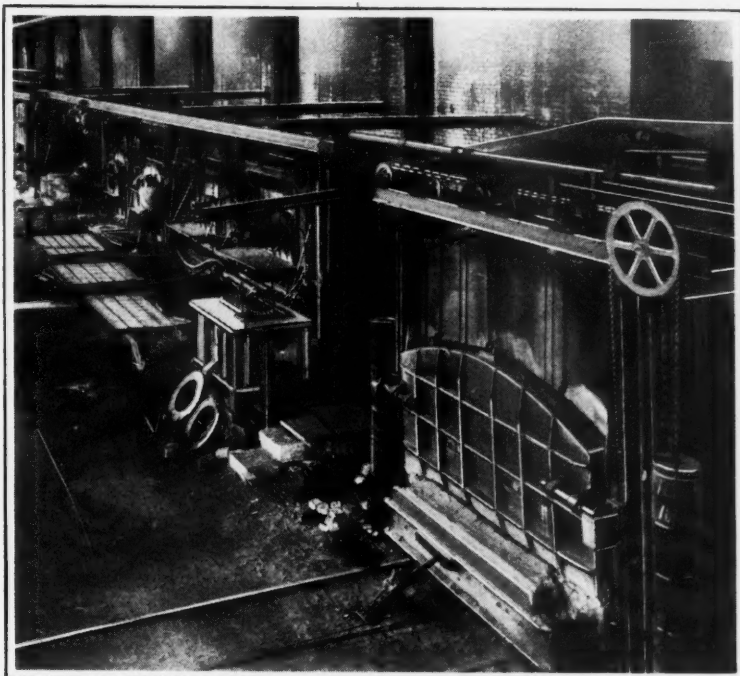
General View in the Heat-treating Department at the Plant of the Tool Steel Gear & Pinion Co.
